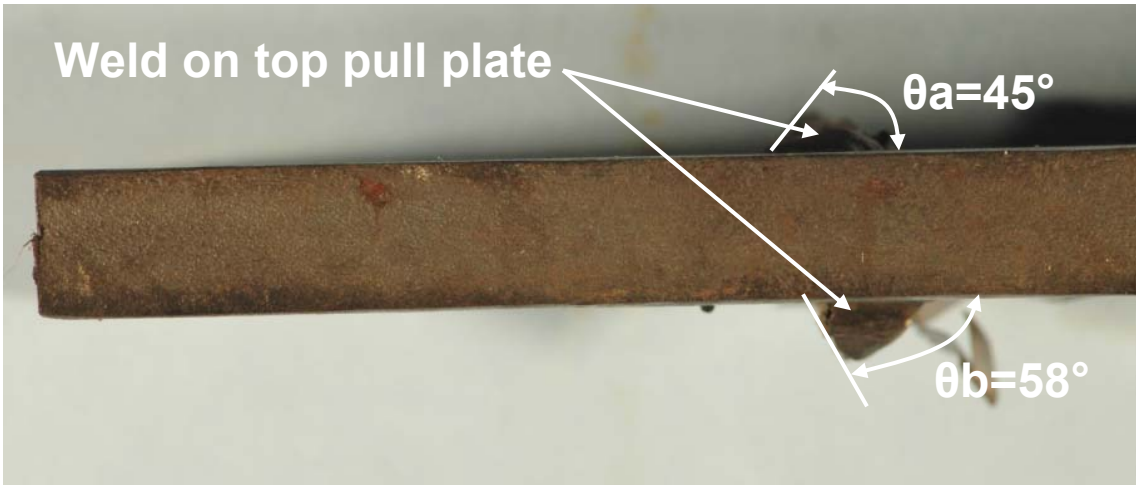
Photograph of a side view Specimen 7, where the profile of the fractured weld on the top pull plate is visible
